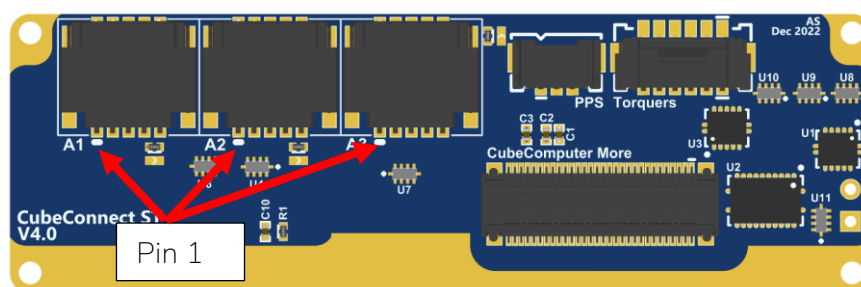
CubeConnect PCB - CubeWheel 1 to 3 Headers
